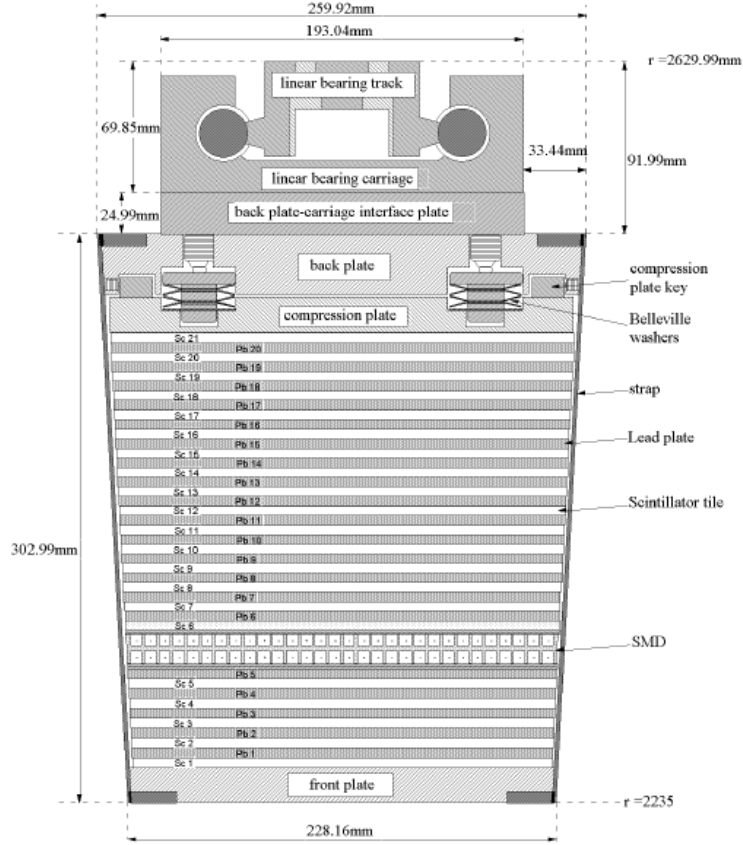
End view of a BEMC module showing the mounting system and the compression components.
